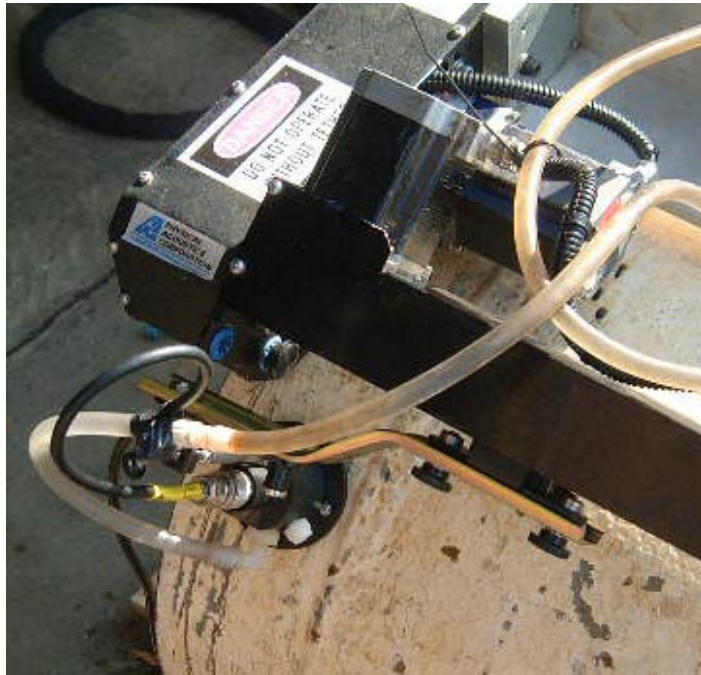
Section of pipe showing weld and LSI scanner with “squirter” probe.
